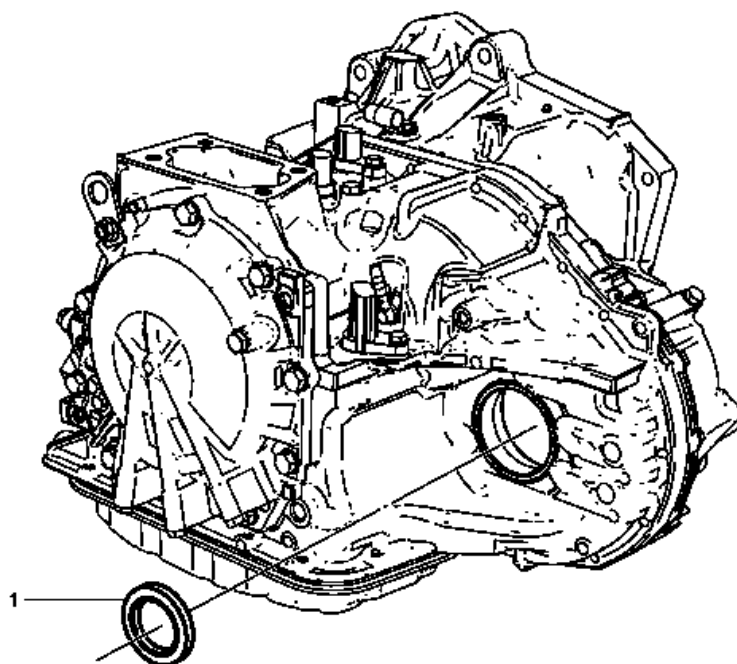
Front Wheel Drive Shaft Seal - Left Side
